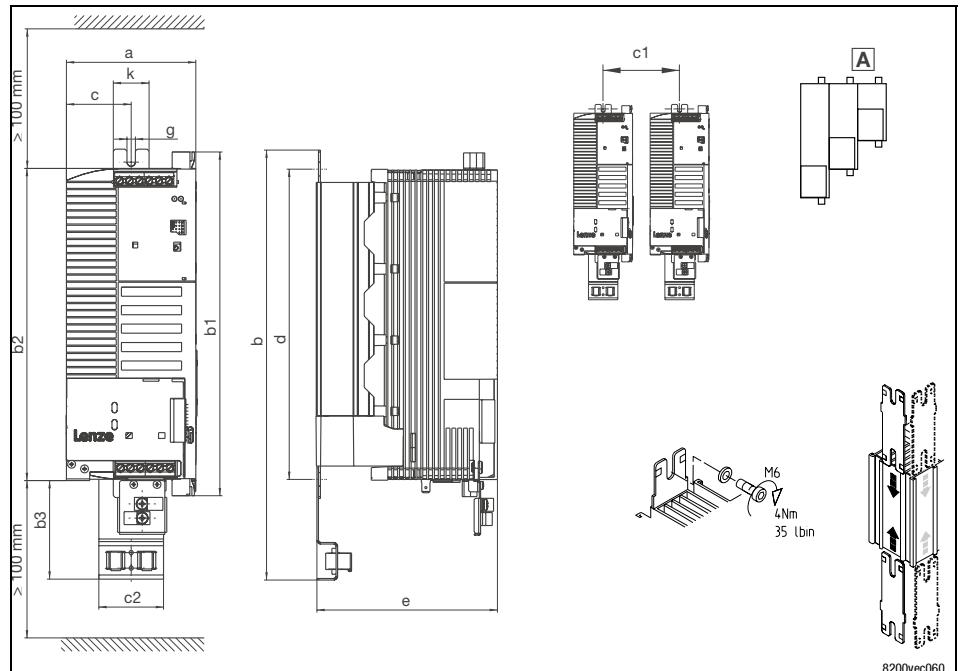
Standard mounting with fixing rails 3 ... 11 kW
